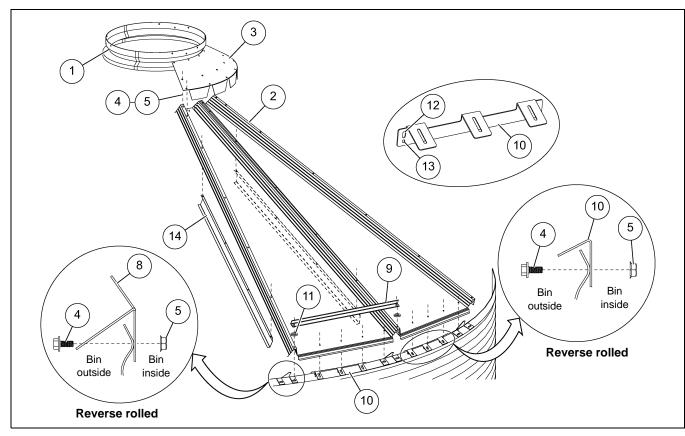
C Roof Panel Assembly (For 24' Diameter Bins)
